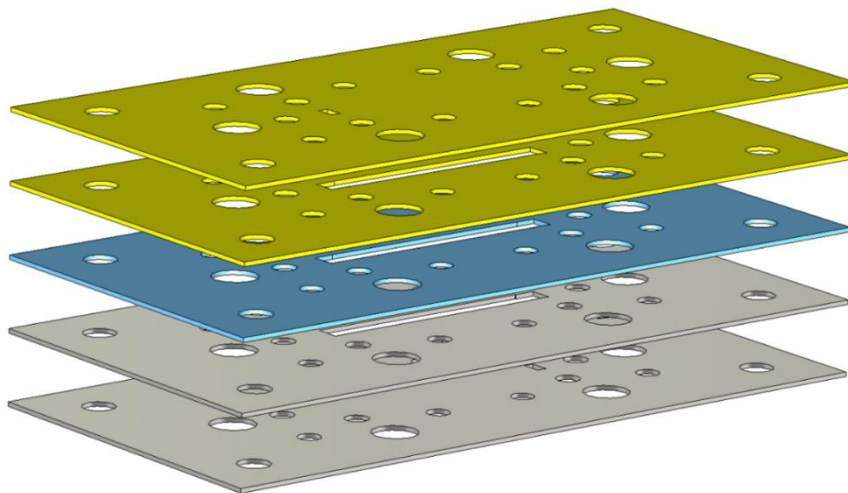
SU-8 Layers forming the waveguide structure. Colours indicate which layers are to be joined into a single piece
